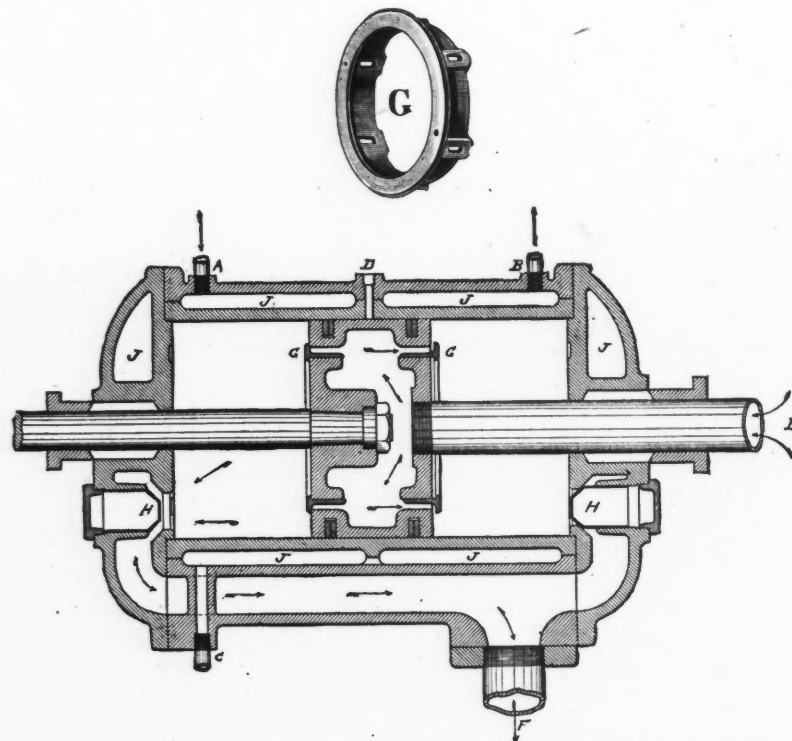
SECTIONAL VIEW OF SERGEANT'S PISTON INLET COLD AIR CYLINDER
